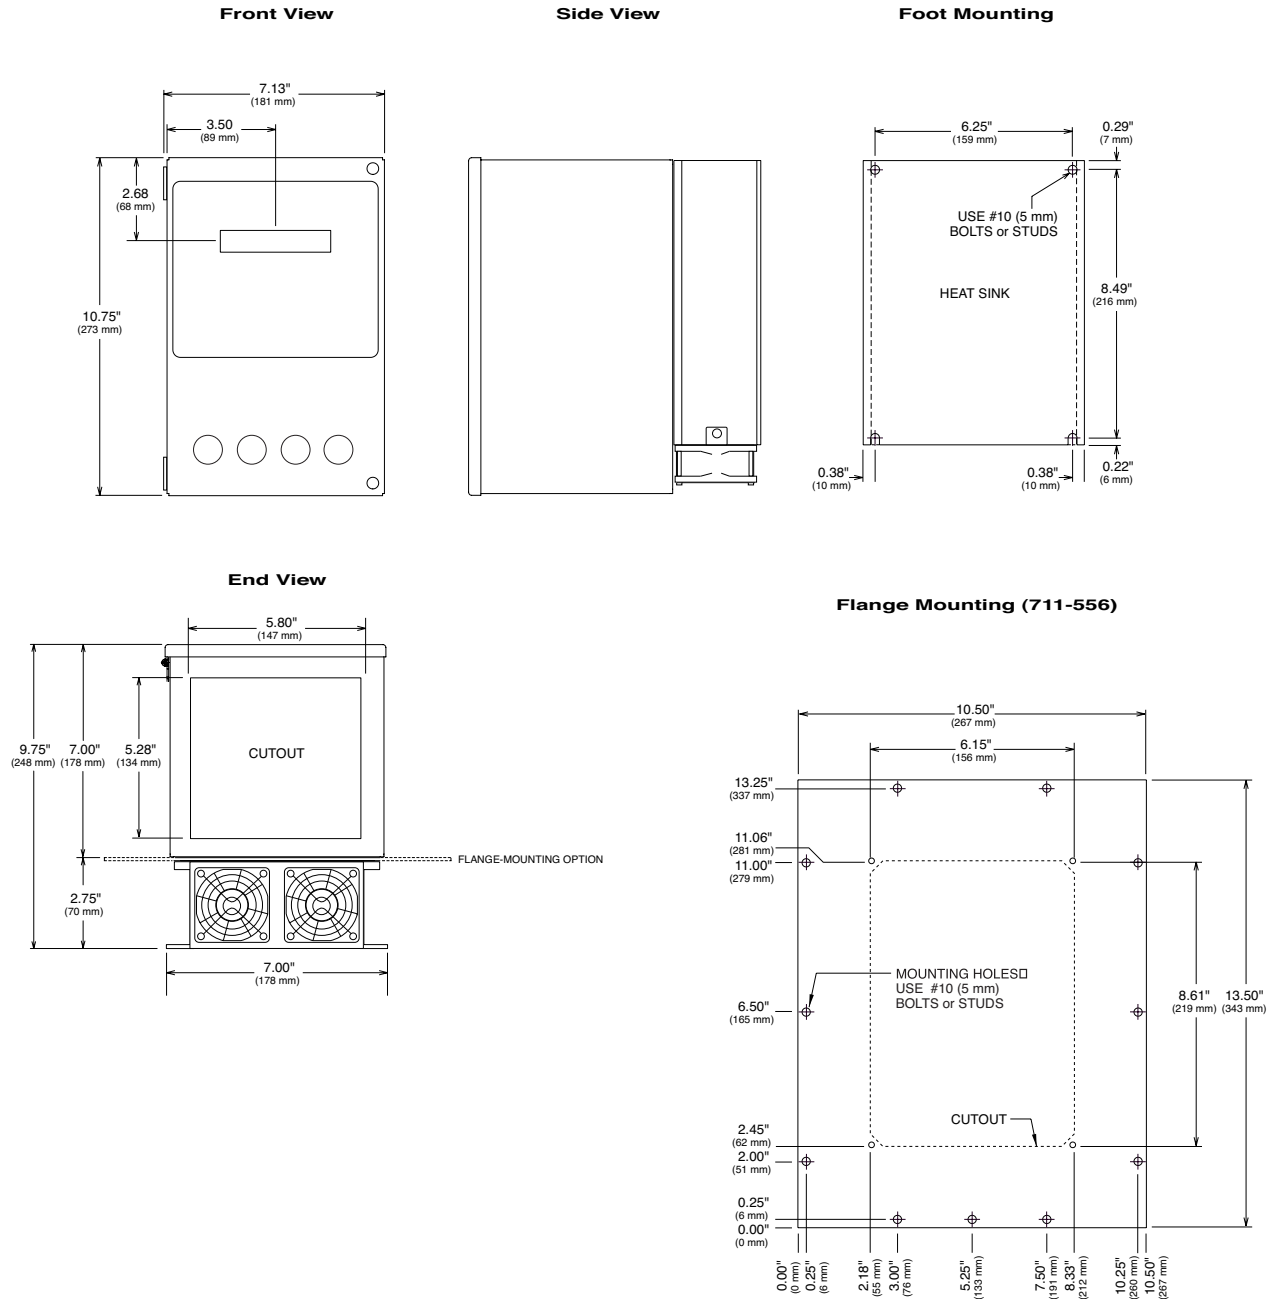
Form 12N Mounting Dimensions (1105 and 1120 Drives)
